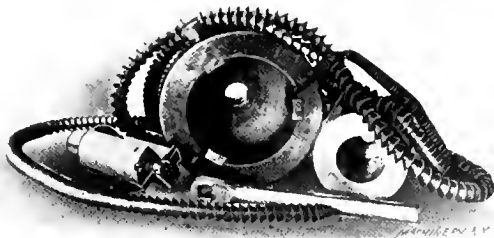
Three-bearing Chuck, Boring Head, Work, and Chip Produced.
